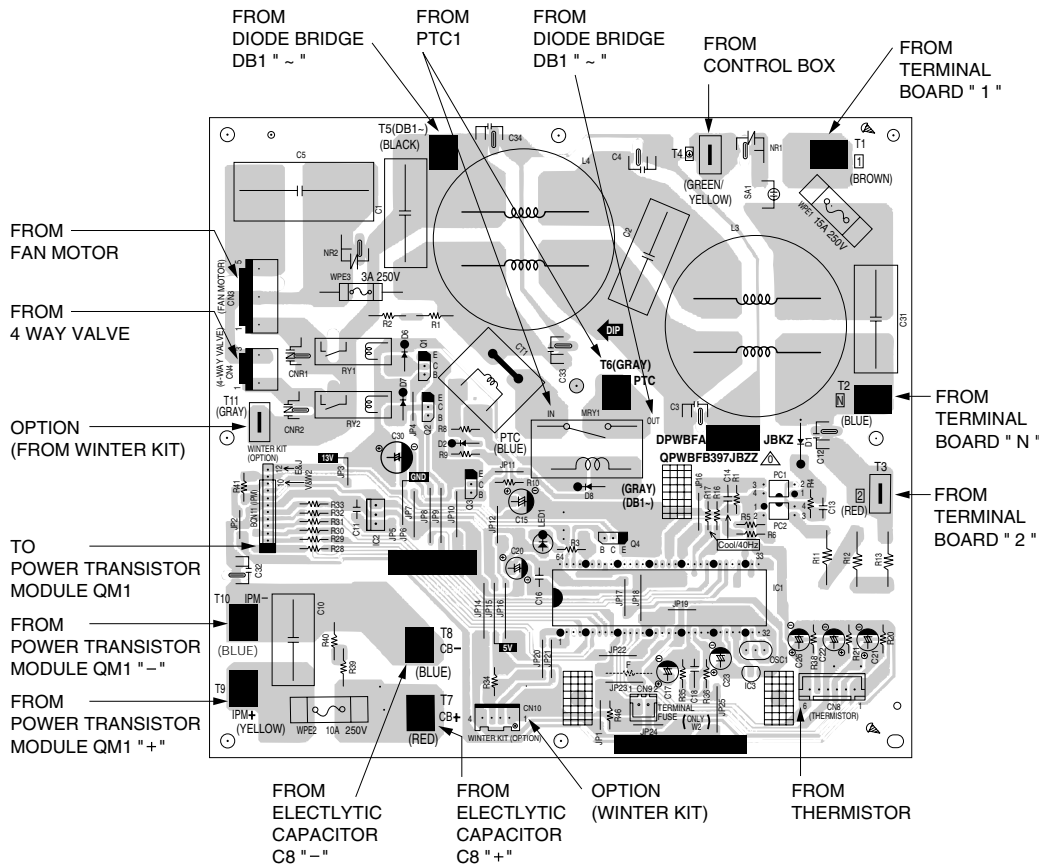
Printed Wiring Board for AE-X08BE-C/X10BE-C
